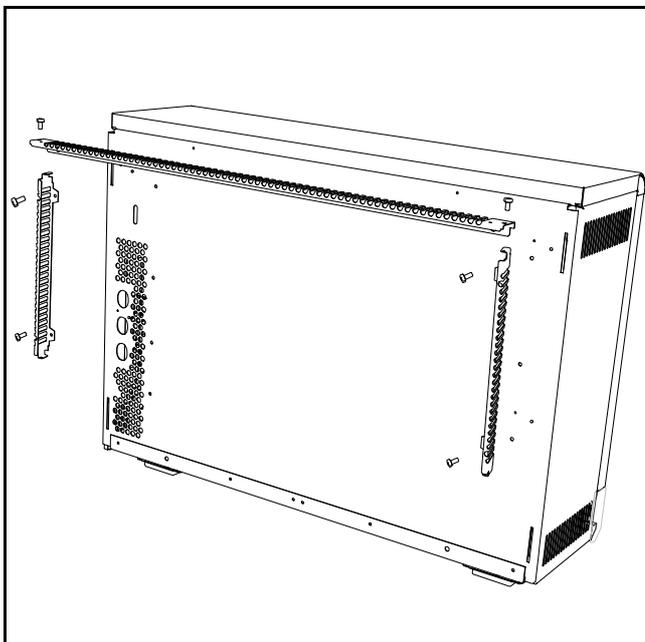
Attach the two side wall brackets to the rear side of the equipment. Attach the upper wall bracket to the two side wall brackets
